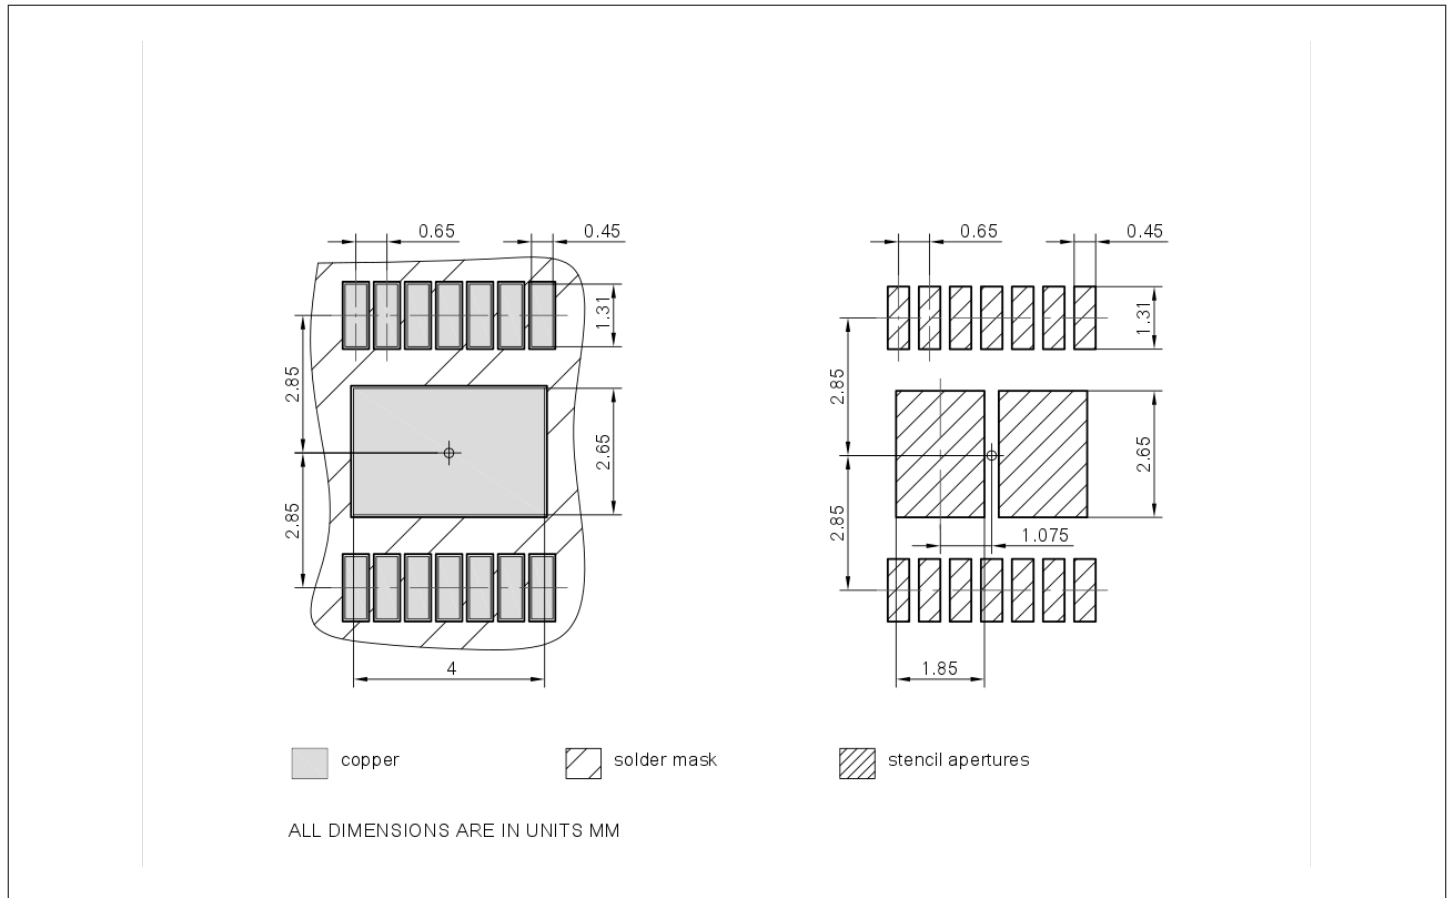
PG-TSDSO-14 (thin (slim) dual small outline 14 pins) package pads and stencil
